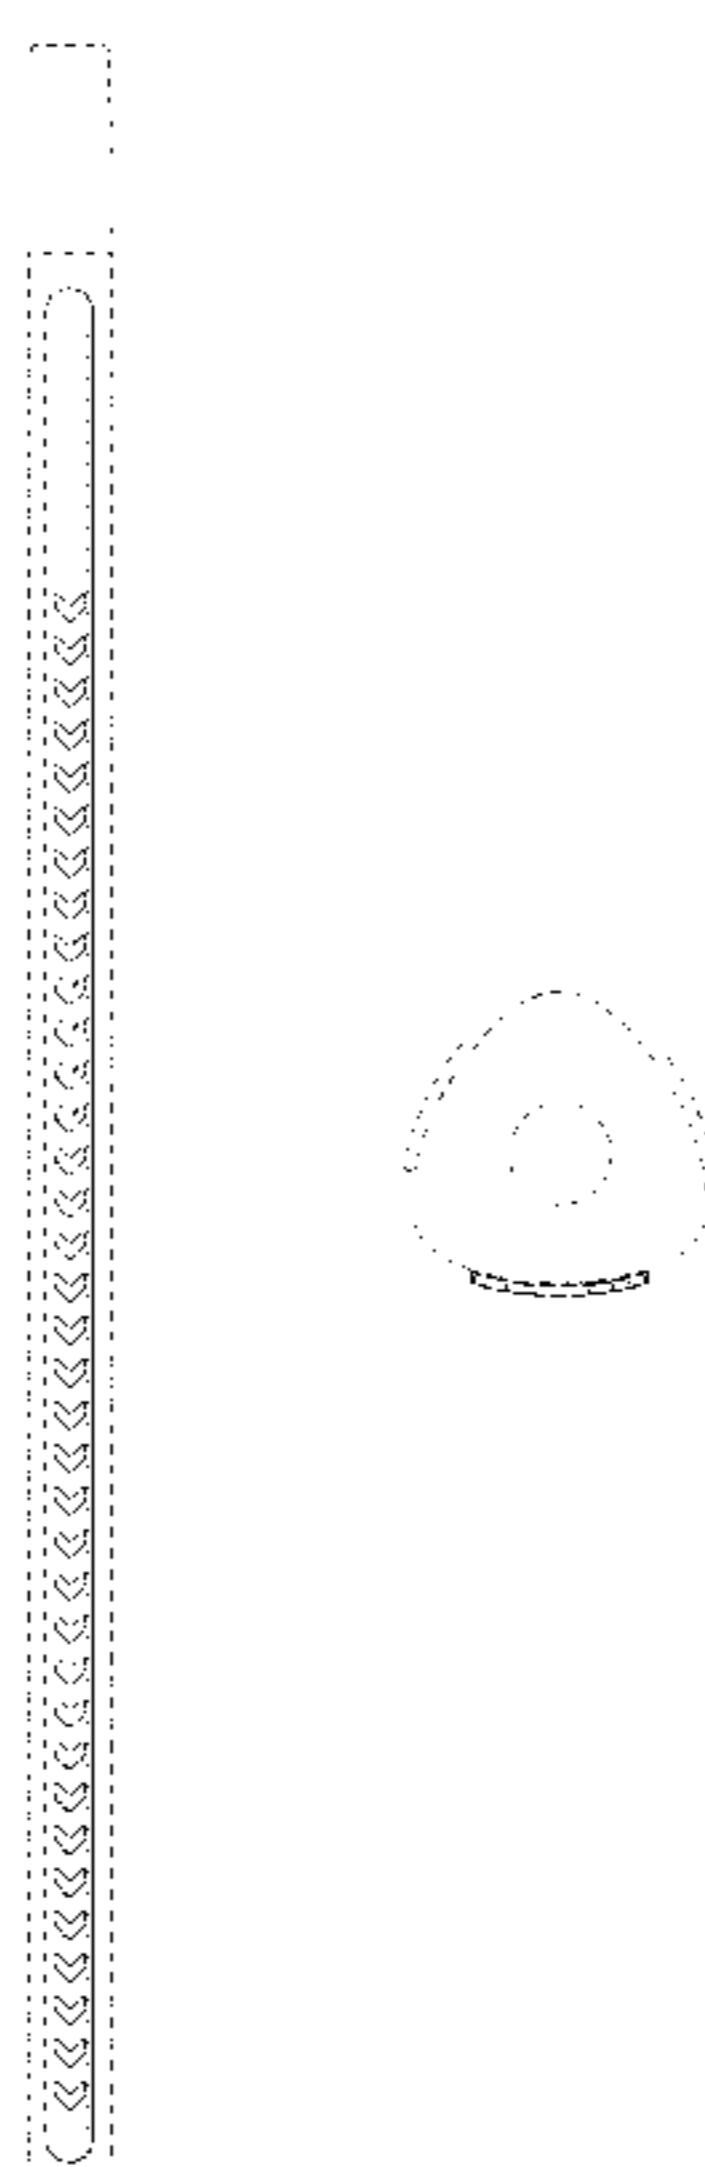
is a bottom view of the grip of FIG. 1 applied to a
